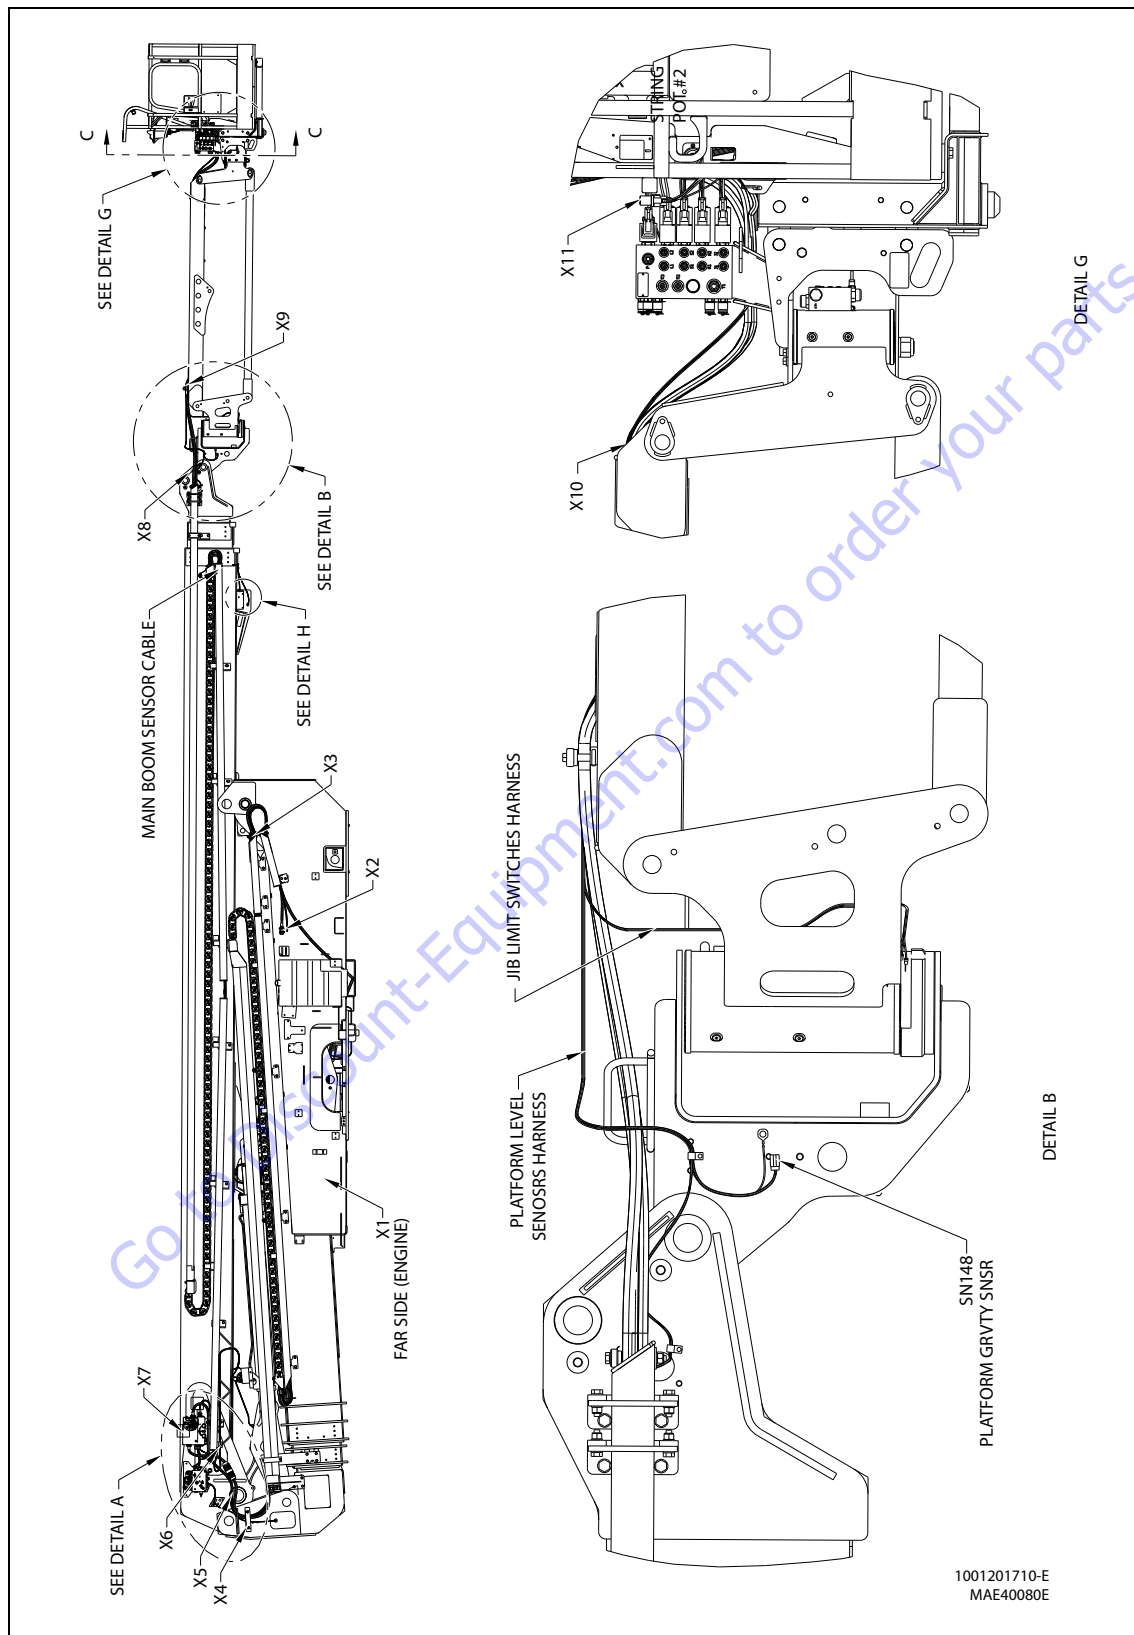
Boom Electrical Installation (4000W Generator) - Sheet 1 of 5
